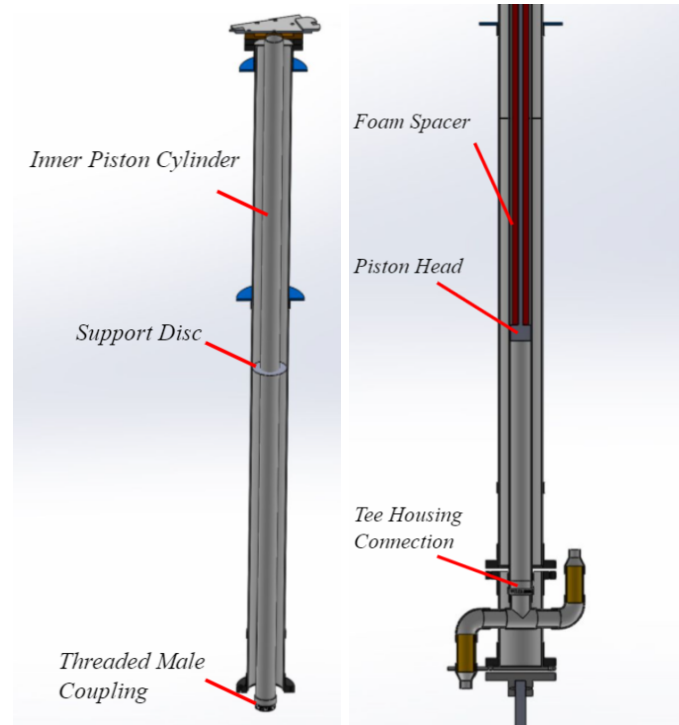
(left): A cross section of the main spar showing the internal piston cylinder, support disc, and threaded male coupling.
